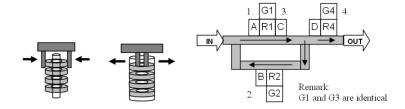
Tape Roll Change Case and Assembly Layout [Frei 2008].
